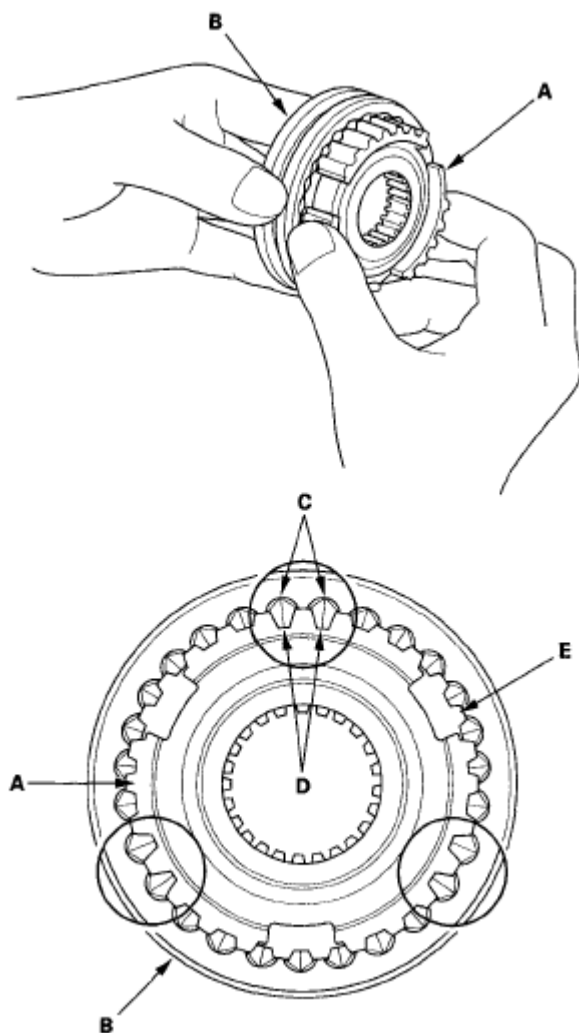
Inspecting Gear Teeth On Synchro Hubs And Synchro Sleeves
